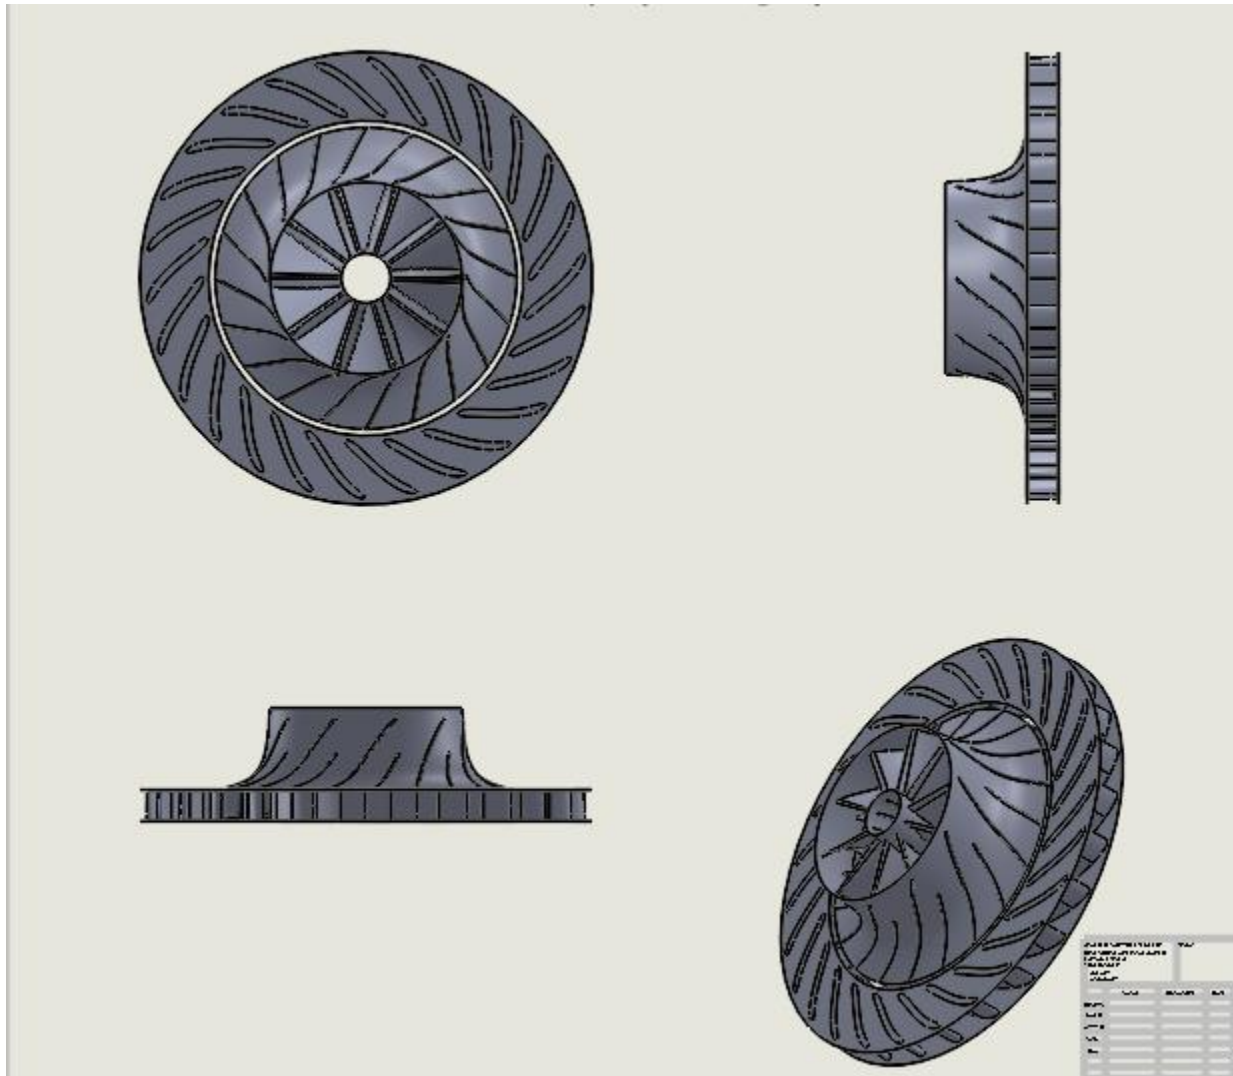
DIFFUSER DIAGRAM WITH DIMENSIONS. ADAPTED FROM SOLIDWORKS DRAWING
